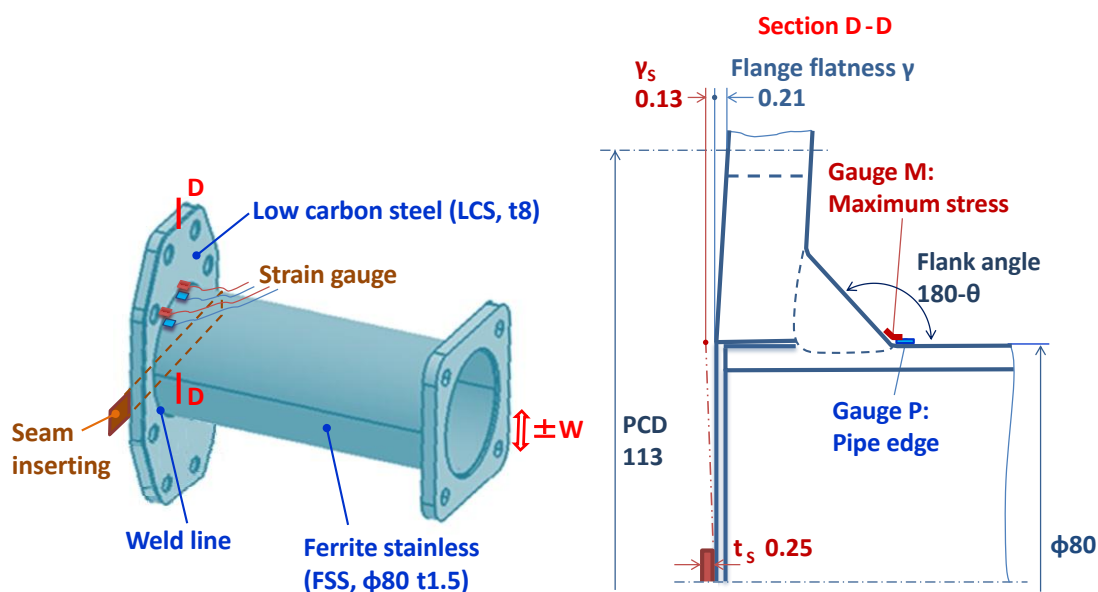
Schematic welded joint and strain gauge position
